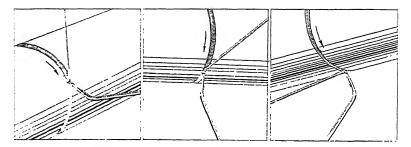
Making a position weld by the Lindeweld process.
